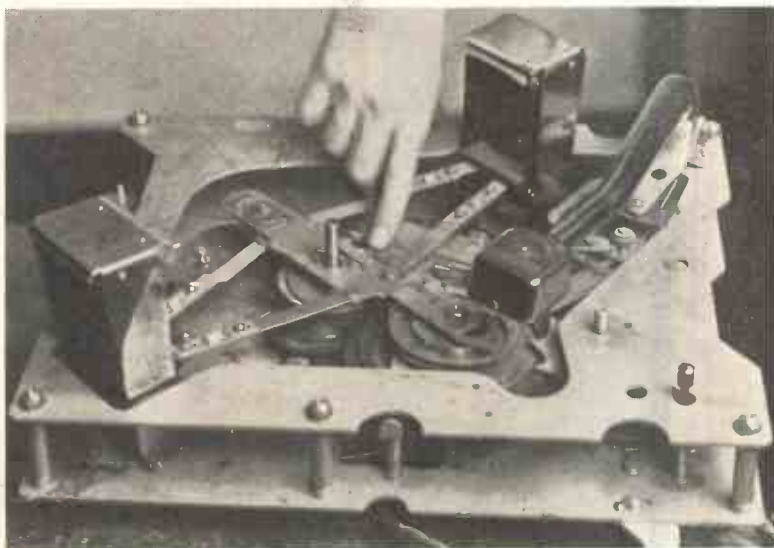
DISENGAGING THE CLUTCH TRIP LEVER.
